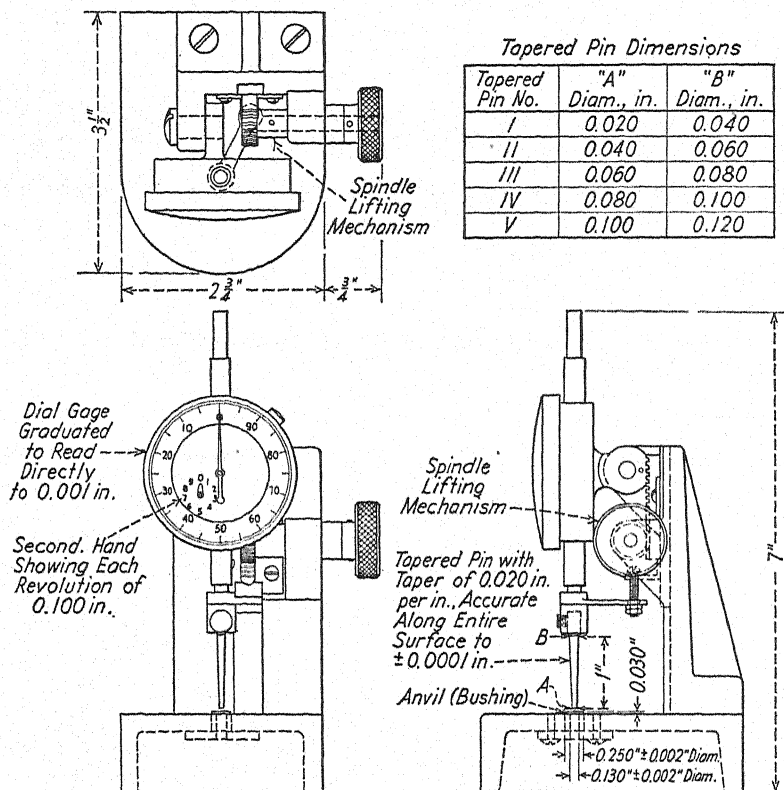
Tapered Pin Gage for Measuring the Hole Size of Mica Stampings.⁴
